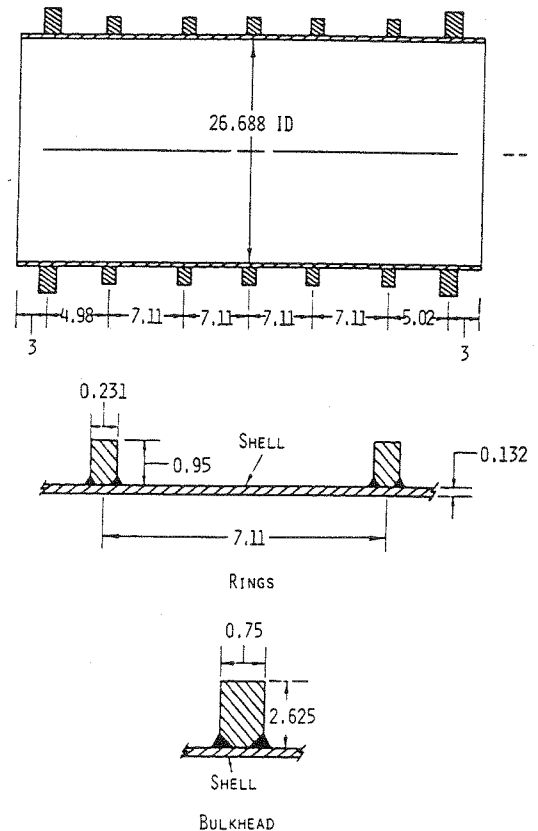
DIMENSIONS OF SPECIMENS BR-4 AND BR-4A
